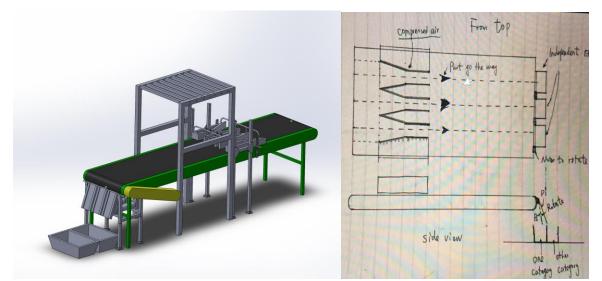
and Fig. 5b: CAD Drawing of Modified Assembly, and Corresponding Drawing
